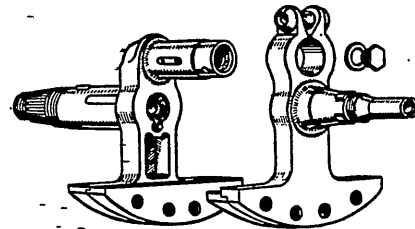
BUILT-UP SINGLE-THROW CRANKSHAFT.
